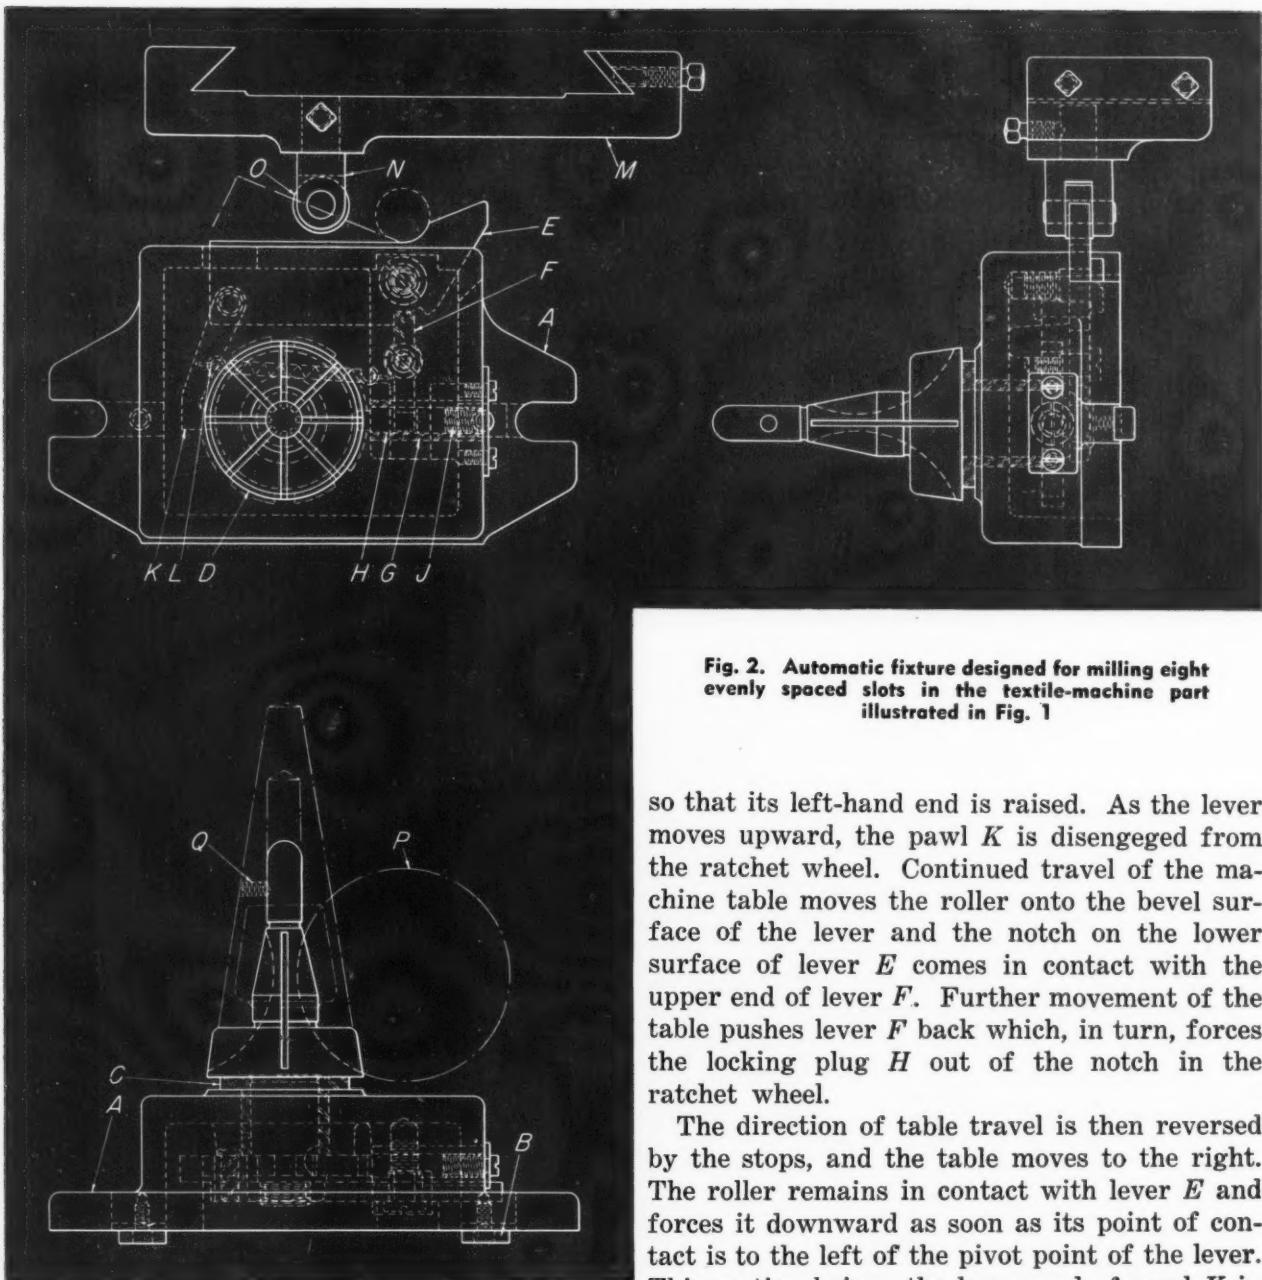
Automatic fixture designed for milling eight evenly spaced slots in the textile-machine part illustrated in Fig. 1
